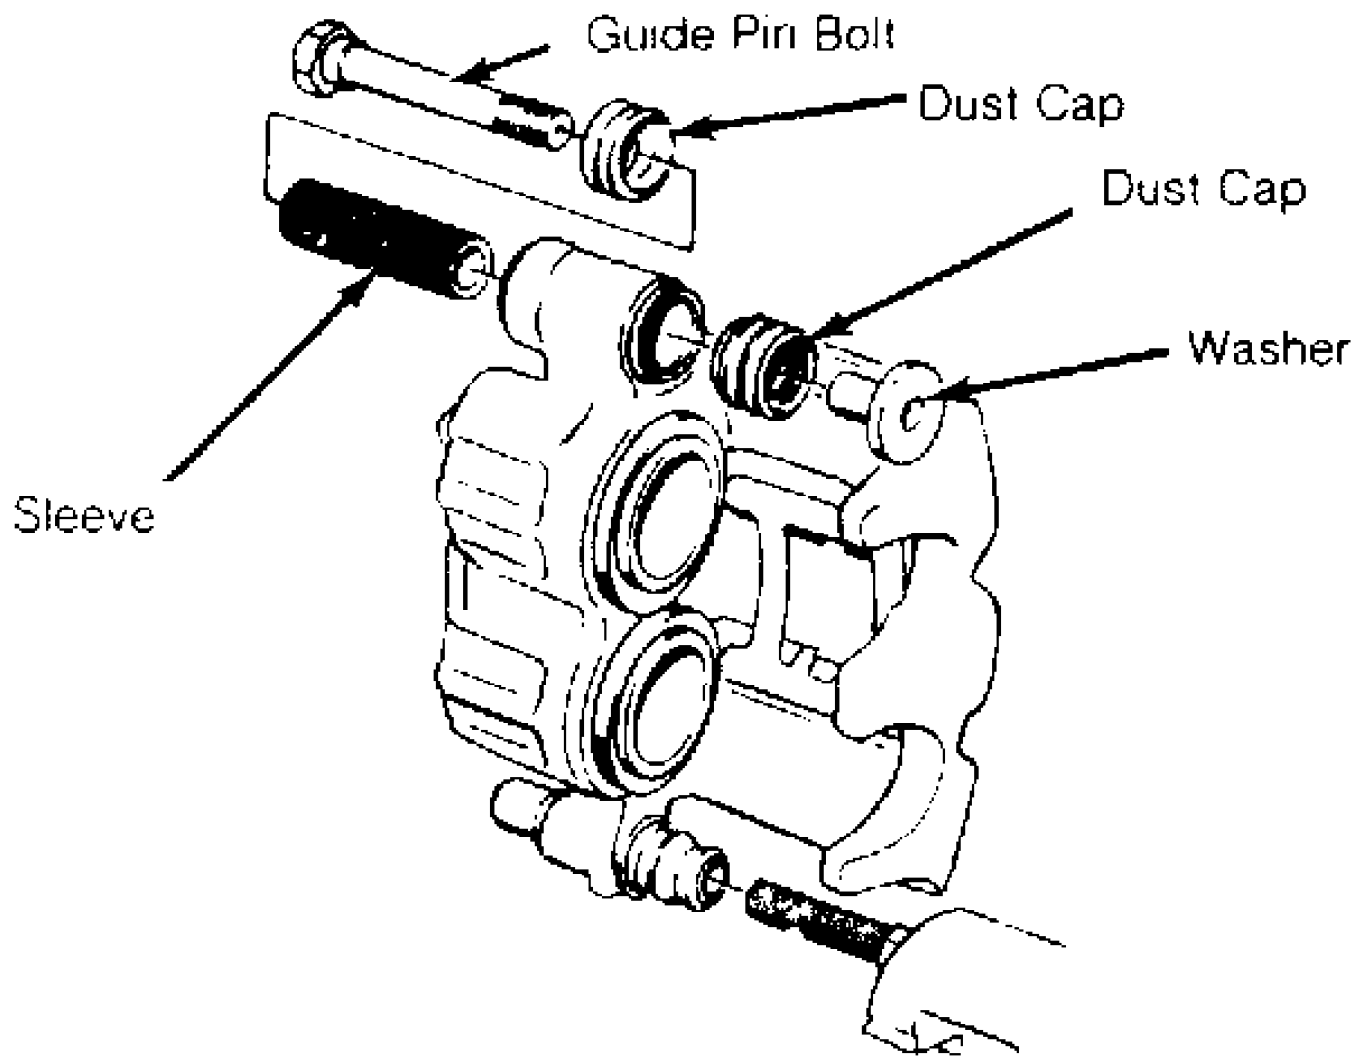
Identifying Bendix (DBA) Front Caliper Components
